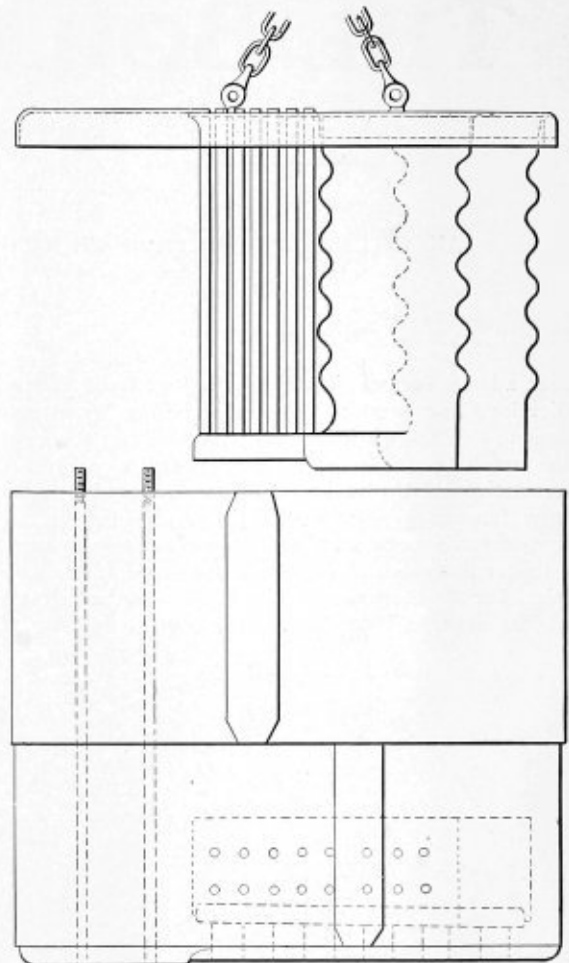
SHOWING REMOVAL OF END PLATE, FURNACES AND INNER TUBE SHEET WITH EVERY TUBE INTACT. BOILER SHELL, STEAM-SPACE STAYS AND PART OF COMBUSTION CHAMBER LEFT UNDISTURBED.
